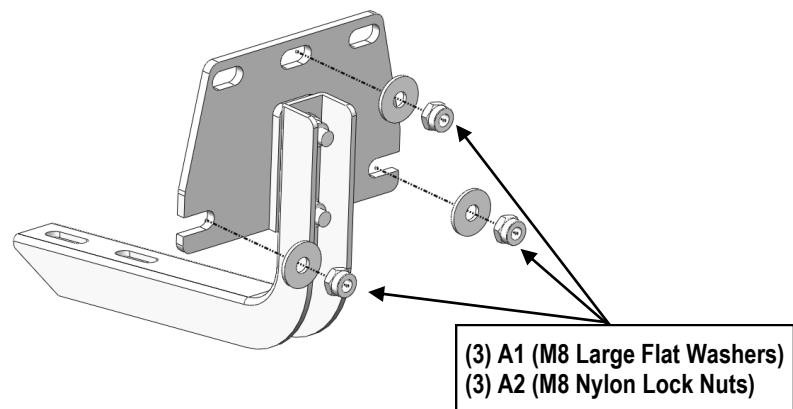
Typical Mounting Bracket (DFM+DFS) Assembly
